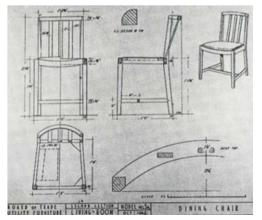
Government approved technical drawing detailing materials permitted, parts permitted and the appearance of the finished product.
